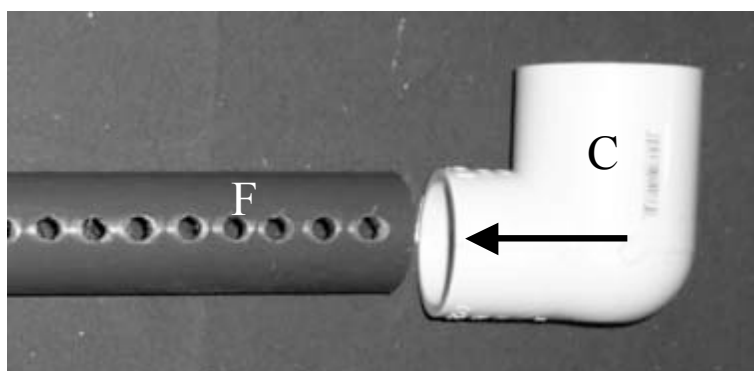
Step 13 – Joining Side Frame to Rear Frame.
